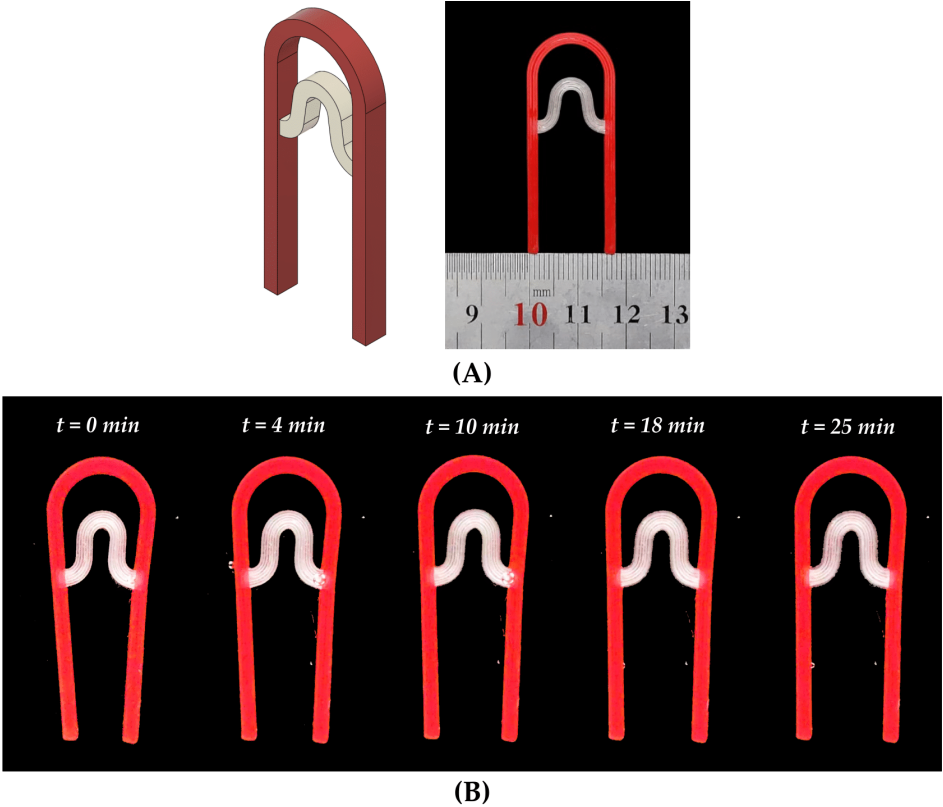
(A) CAD models & prototypes and (B) shape-morphing test for actuator 31.
